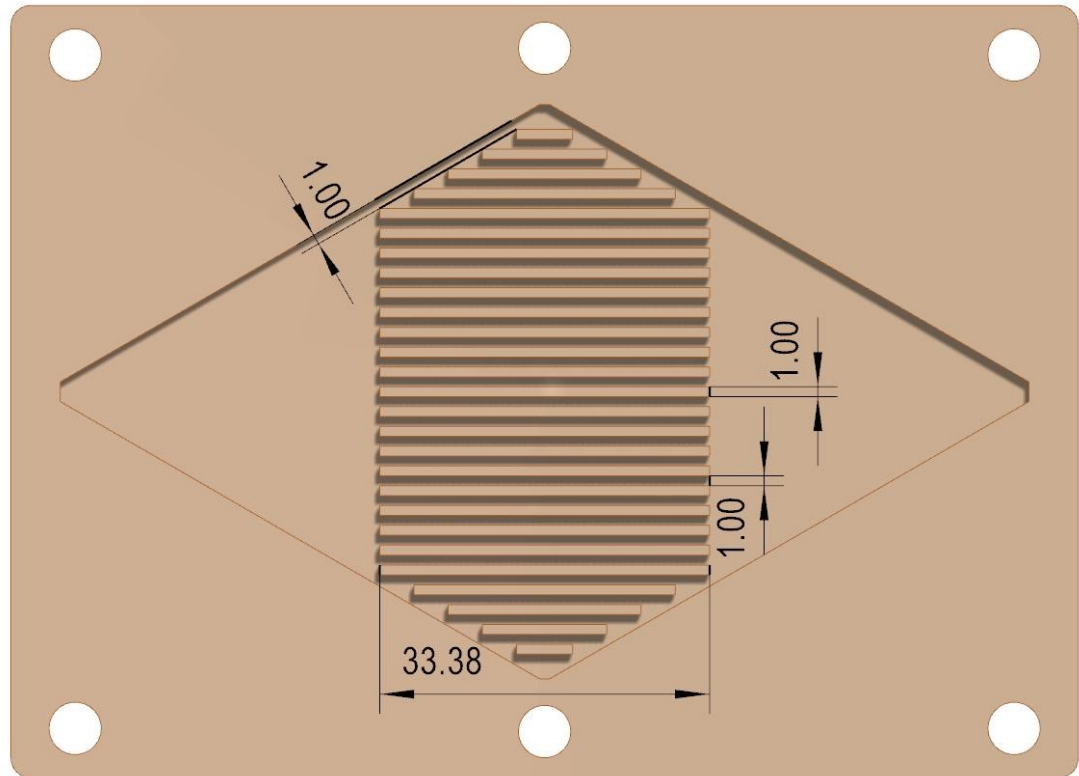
Dimensions of MCSF (mini channel short fin) heat sink.
